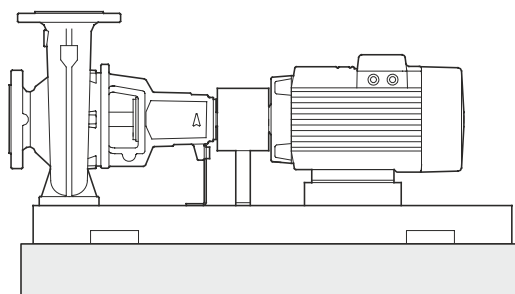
Schematic view of SNK pump-motor unit mounted on a base frame
